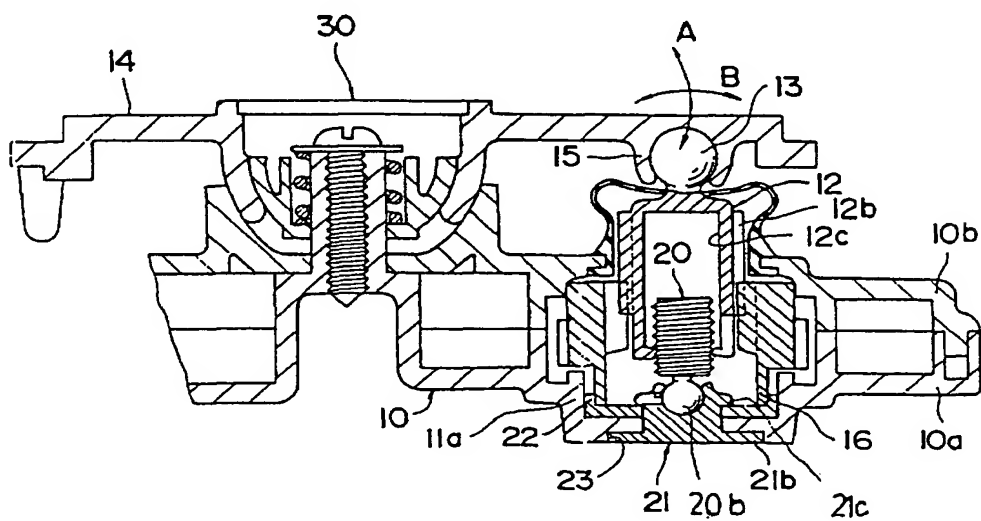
A zoom up cross sectional view of the major portion regarding to this design
